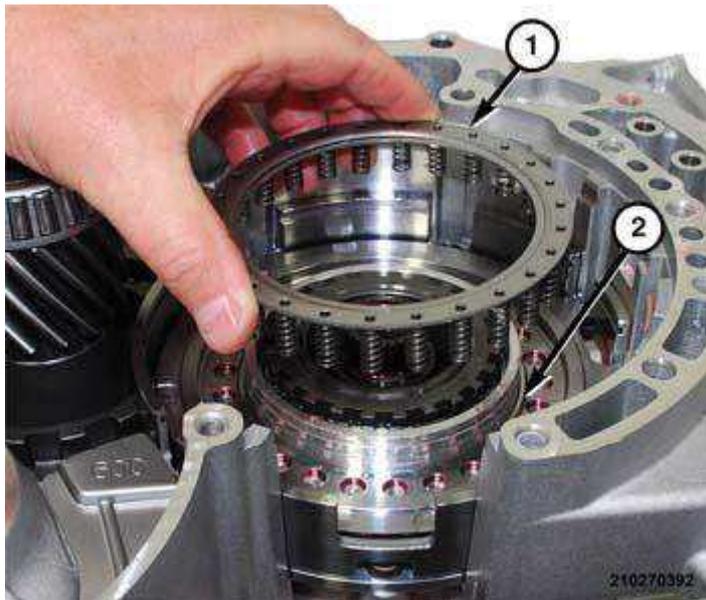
Underdrive Spring Retainer & Underdrive Brake Piston
